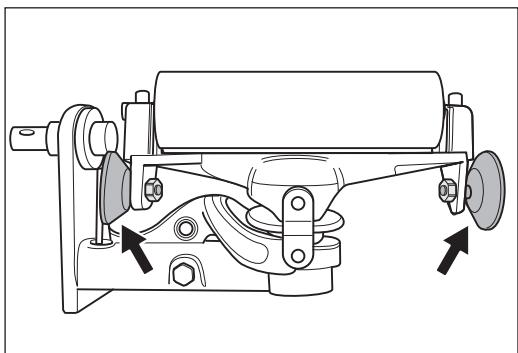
The two guide rollers must be rotatable easily! Otherwise they must be replaced!
